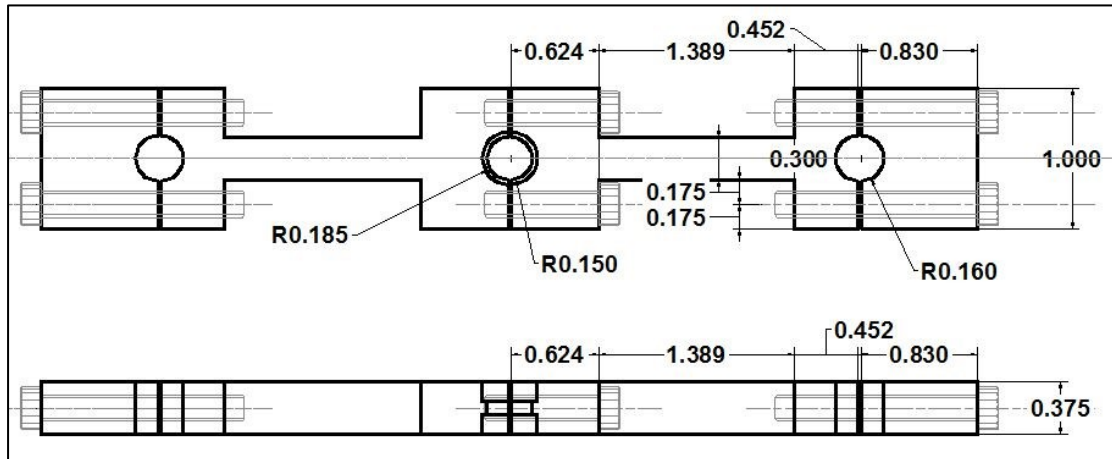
Upper aluminum fixture used to attach the LVDTs to the DB-specimen
